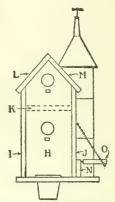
End View of Bird Castle shown in Fig. 494, with One Tower in Position
